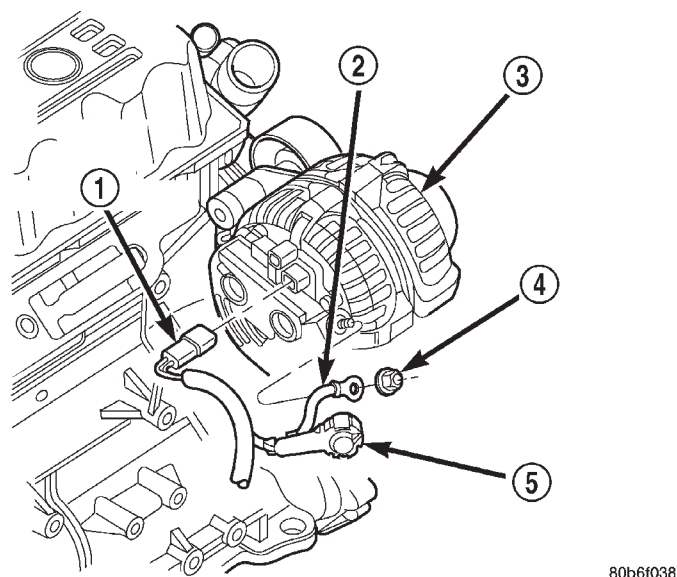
Generator B+ Cable and Field Wire Connections (Typical—4.0L Engine Shown)
